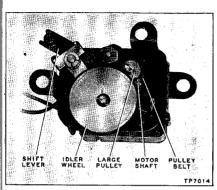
Motor, Showing Pulley, Bolt, and Shift Lever
